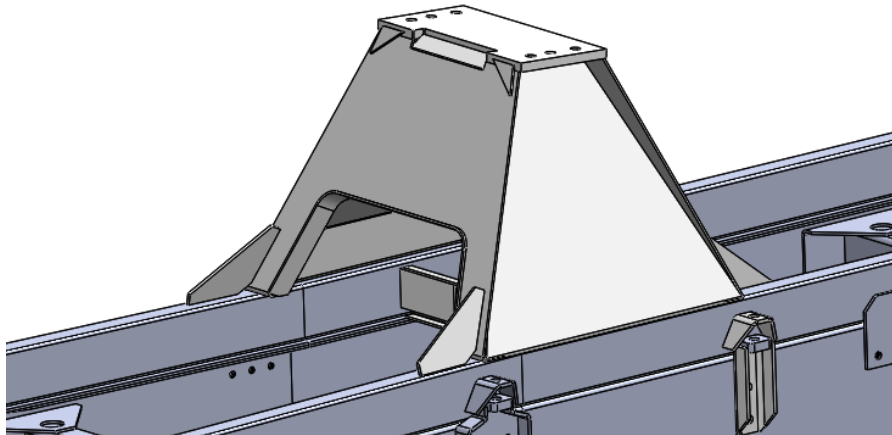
Existing Front Drum Support on Sub-Frame
